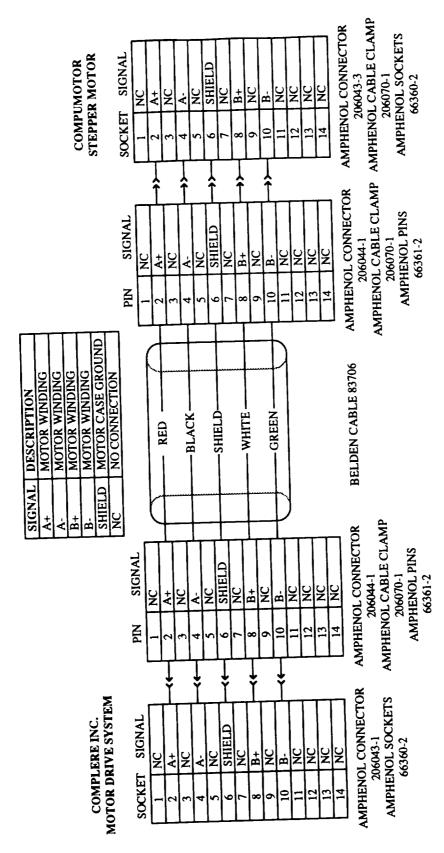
Motor Drive System to Compumotor Stepper Motor Cable.
